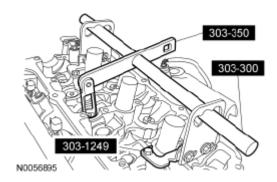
Identifying Valve Spring Compressors Courtesy of FORD MOTOR CO.
